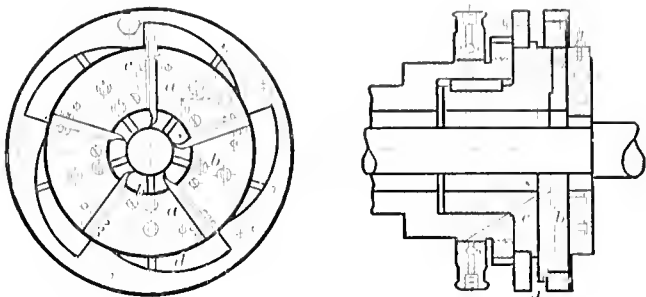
Hollow Mill used in Machine shown in Fig. 1.
